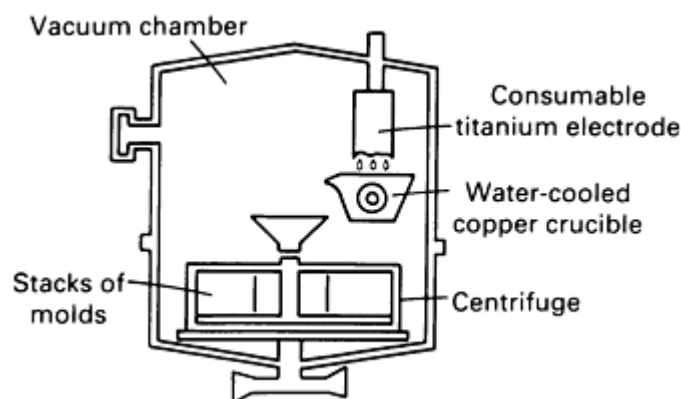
Schematic of a centrifugal vacuum casting furnace
